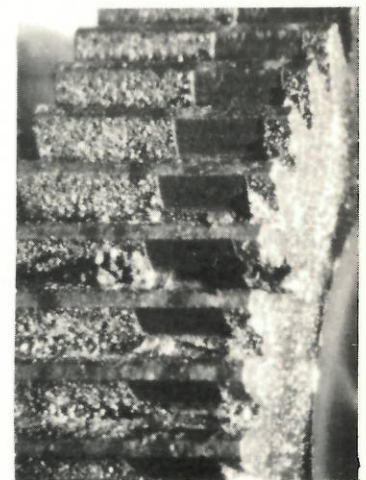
Tooth Wear and Debris With Oil-Filled Polyimide Gear
